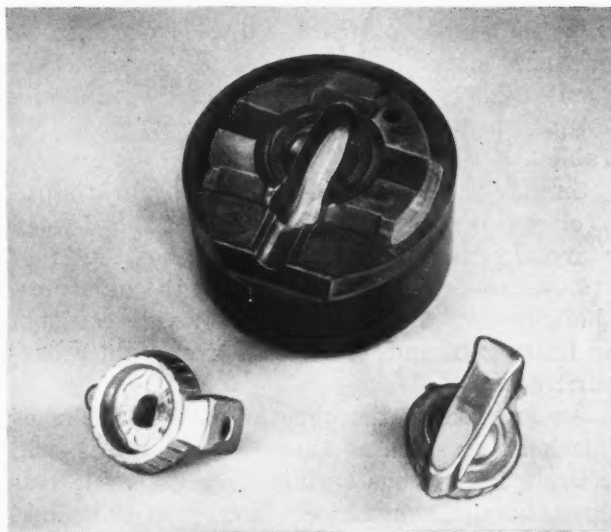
More than 75,000 of the cast-aluminum washing machine parts shown at bottom of illustration have been produced in the single-impression die above
